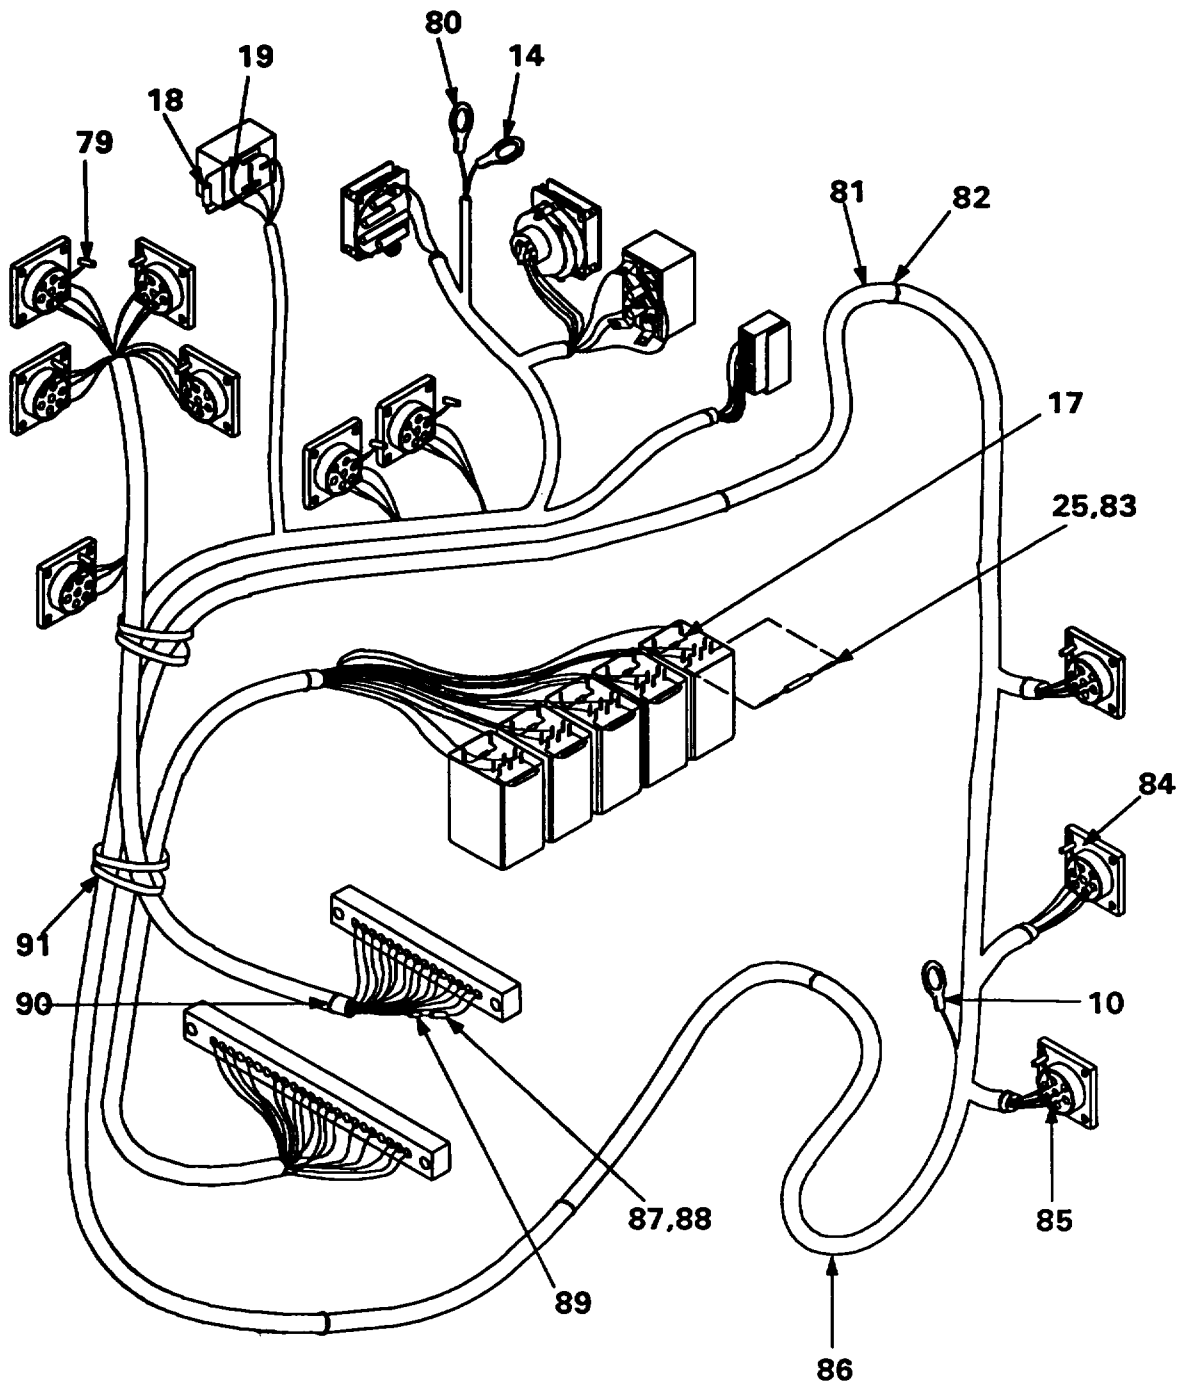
Control Assembly 11784504 (Sheet 3 of 3)
